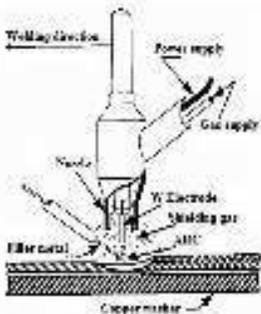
Schematic portrayal of insoluble anode circular segment welding
